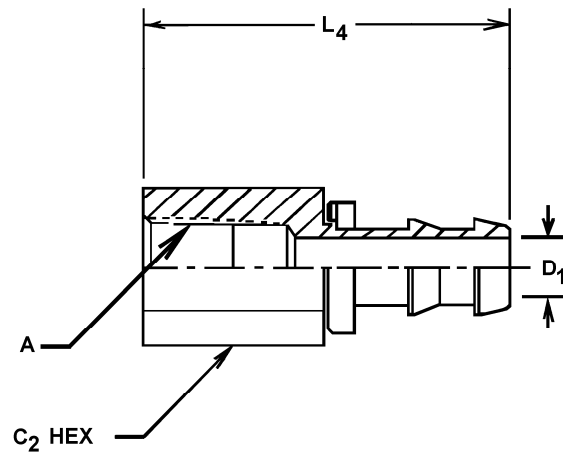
FEMALE PIPE THREAD PUSH-ON HOSE FITTING
